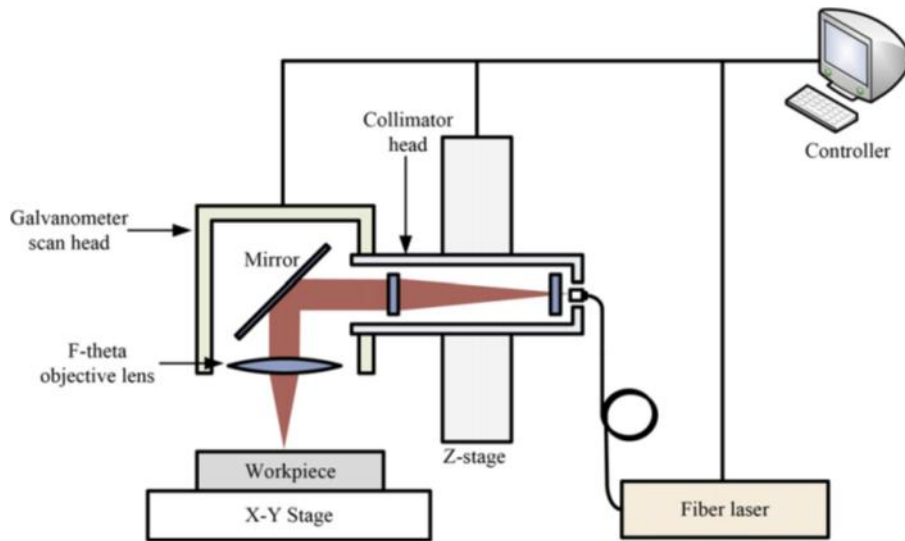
Laser beam machining setup for fabrication of micro-pin array [9]
